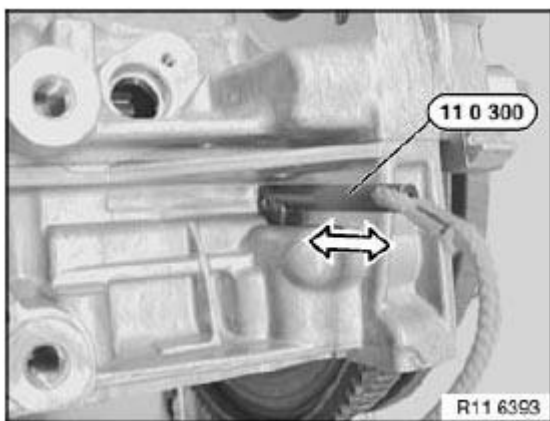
Securing Flywheel In Position Using Special Tool 11 0 300
